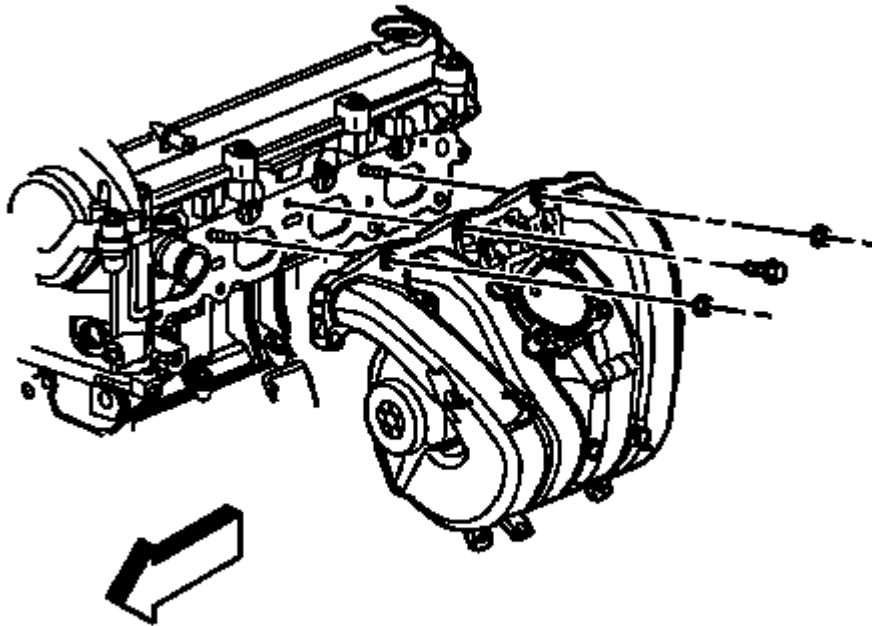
Identifying Intake Manifold, Bolts & Nuts
